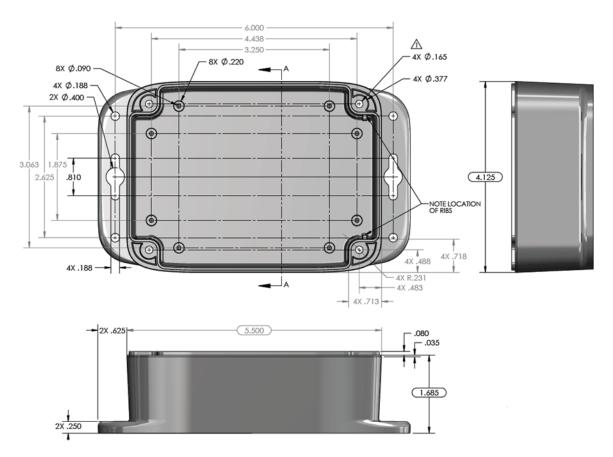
Wireless transceiver dimension (in inch) for Wireless Scour Probe
